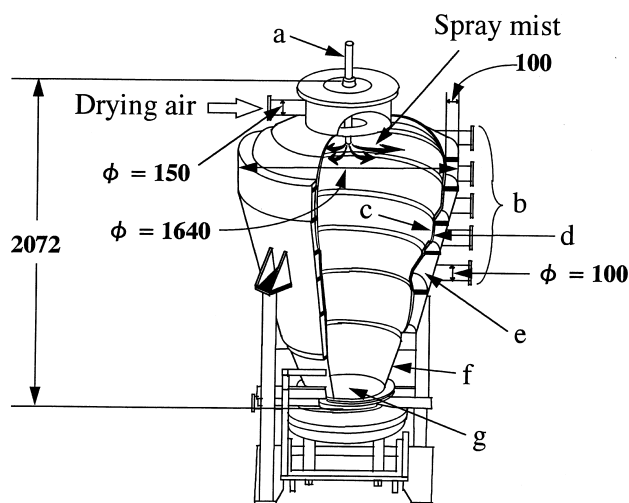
Schematic of the new type spray-drier; (a): spraying nozzle (b): exhaust pipes (c): internal filter (d): external filter (e): intermediate exhaust chamber (f): container (g): perforated plate. Dimensions in millimeters.
